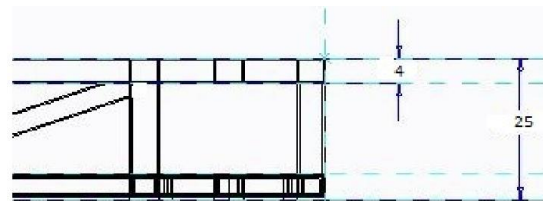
Height of the chassis shown from the wireframe model of the chassis (all units are in cm)
